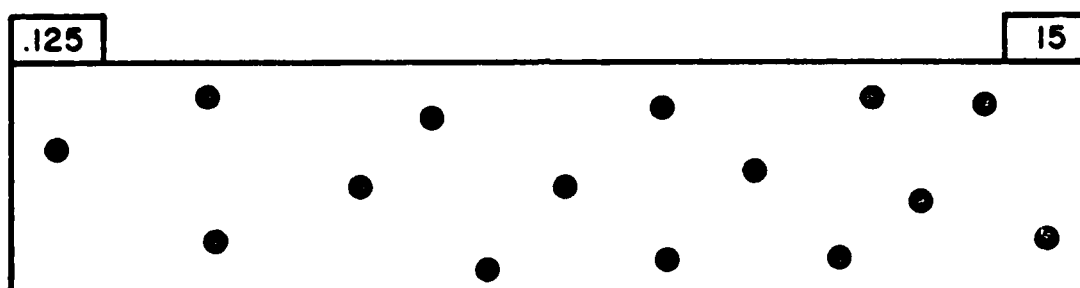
Class 3 Weld Radiographic Inspection Standards for Randomly Dispersed Porosity (Sheet 6 of 7).
